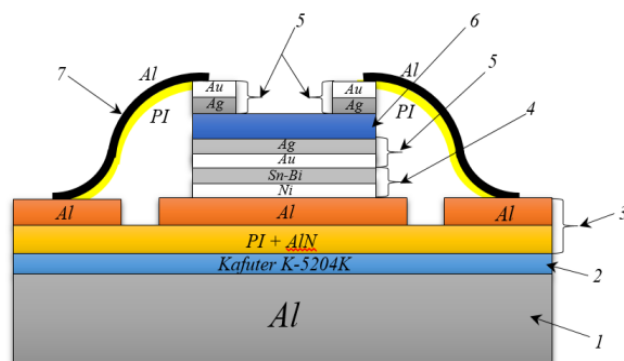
Structural diagram of the TQS of a CPV receiver: 1 – board base, 2 – adhesive dielectric material, 3 – adhesiveless thermally conductive lacquer-foil Al-PI dielectric material, 4 – mounting pad on the board, 5 – mounting pad on the SC, 6 – SC, 7 – flexible Al-PI interconnection board.
